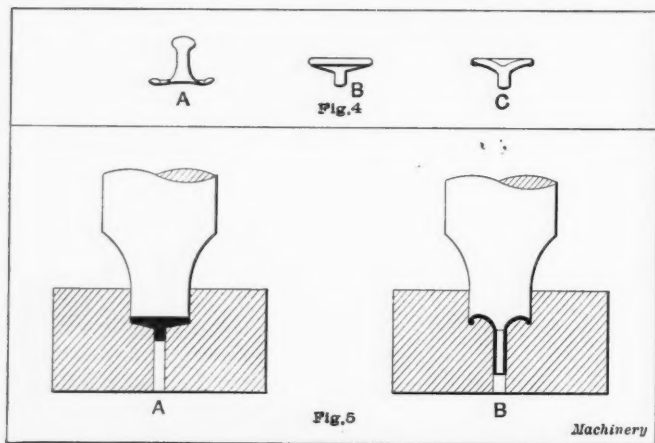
A, Collar Button; B, Fastener; C, Improved Fastener. Fig. 5. A, Die for Fastener, with Work in Place; B, Die intended to produce a Fastener of Improved Design, showing Piece actually produced
